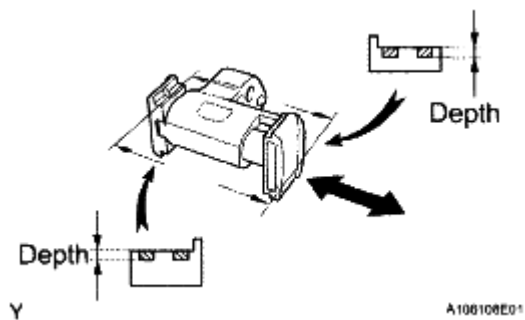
Identifying Worn Depth Of No. 2 Chain Tensioner
